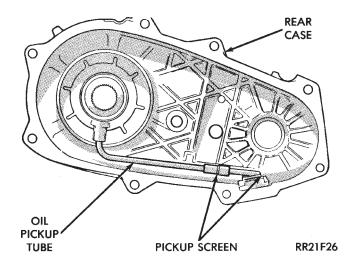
Pickup Tube, Oil Screen And Pump Installation
